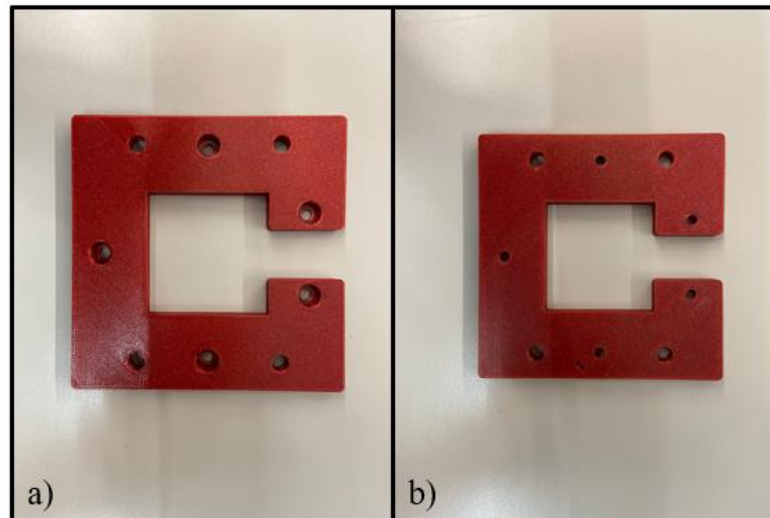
Stepper motor base: (a) top view, (b) bottom view.
